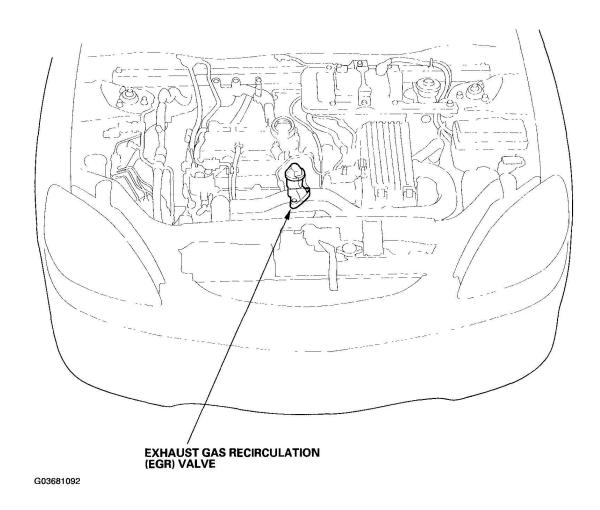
Identifying EGR System Component Location Courtesy of AMERICAN HONDA MOTOR CO., INC.
